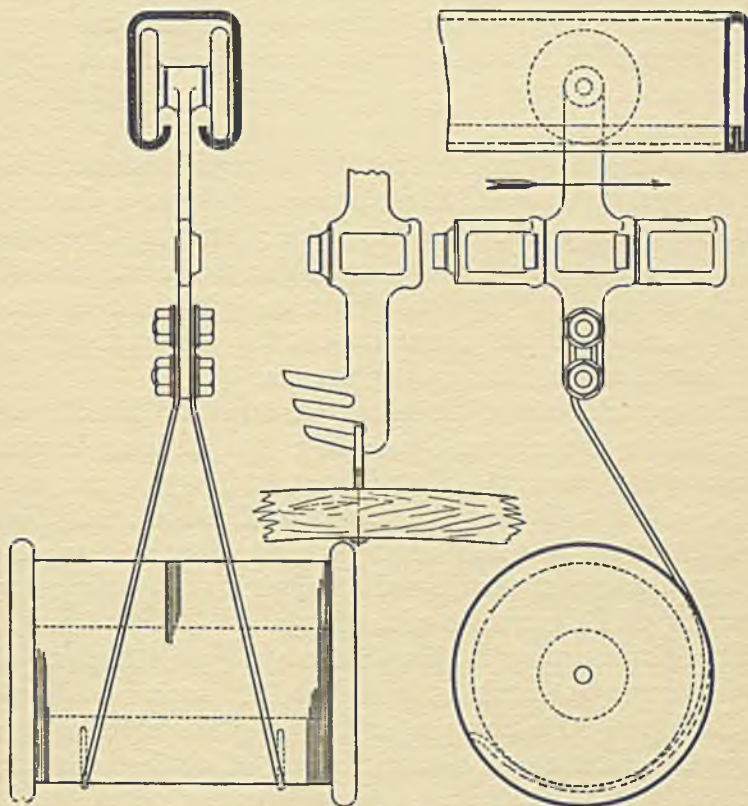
Carriers for Light Overhead Chain Conveyors.
